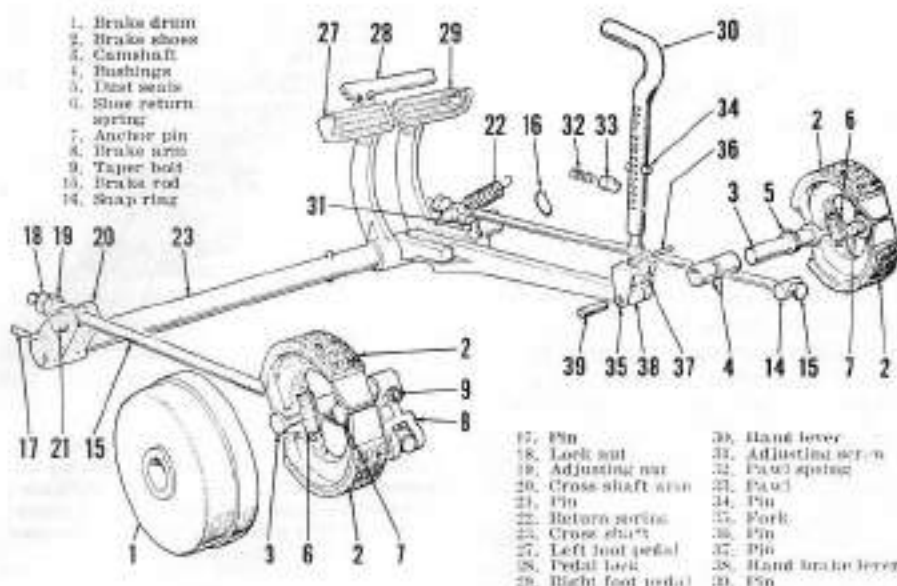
Exploded view of model 990 brake system; other models, except 1200, are similar. On models 770, 780 and 3800, brake rods (15) are turned with adjusting nut (19) end to rear.
